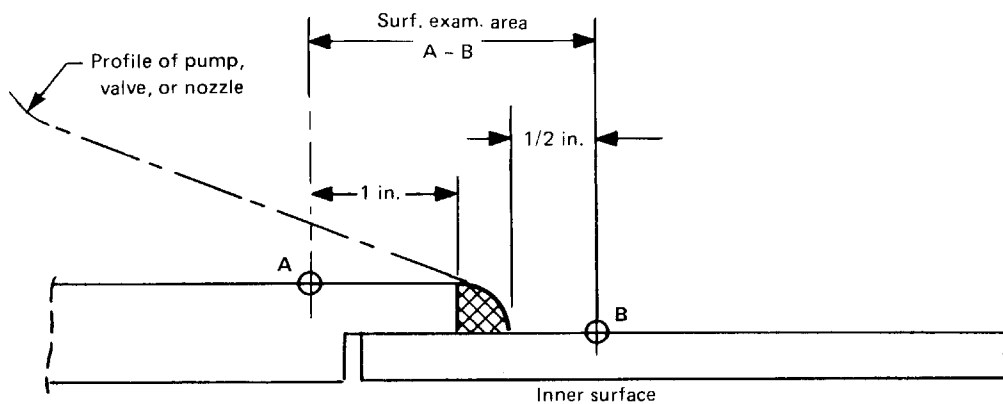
WELDS IN PIPING
